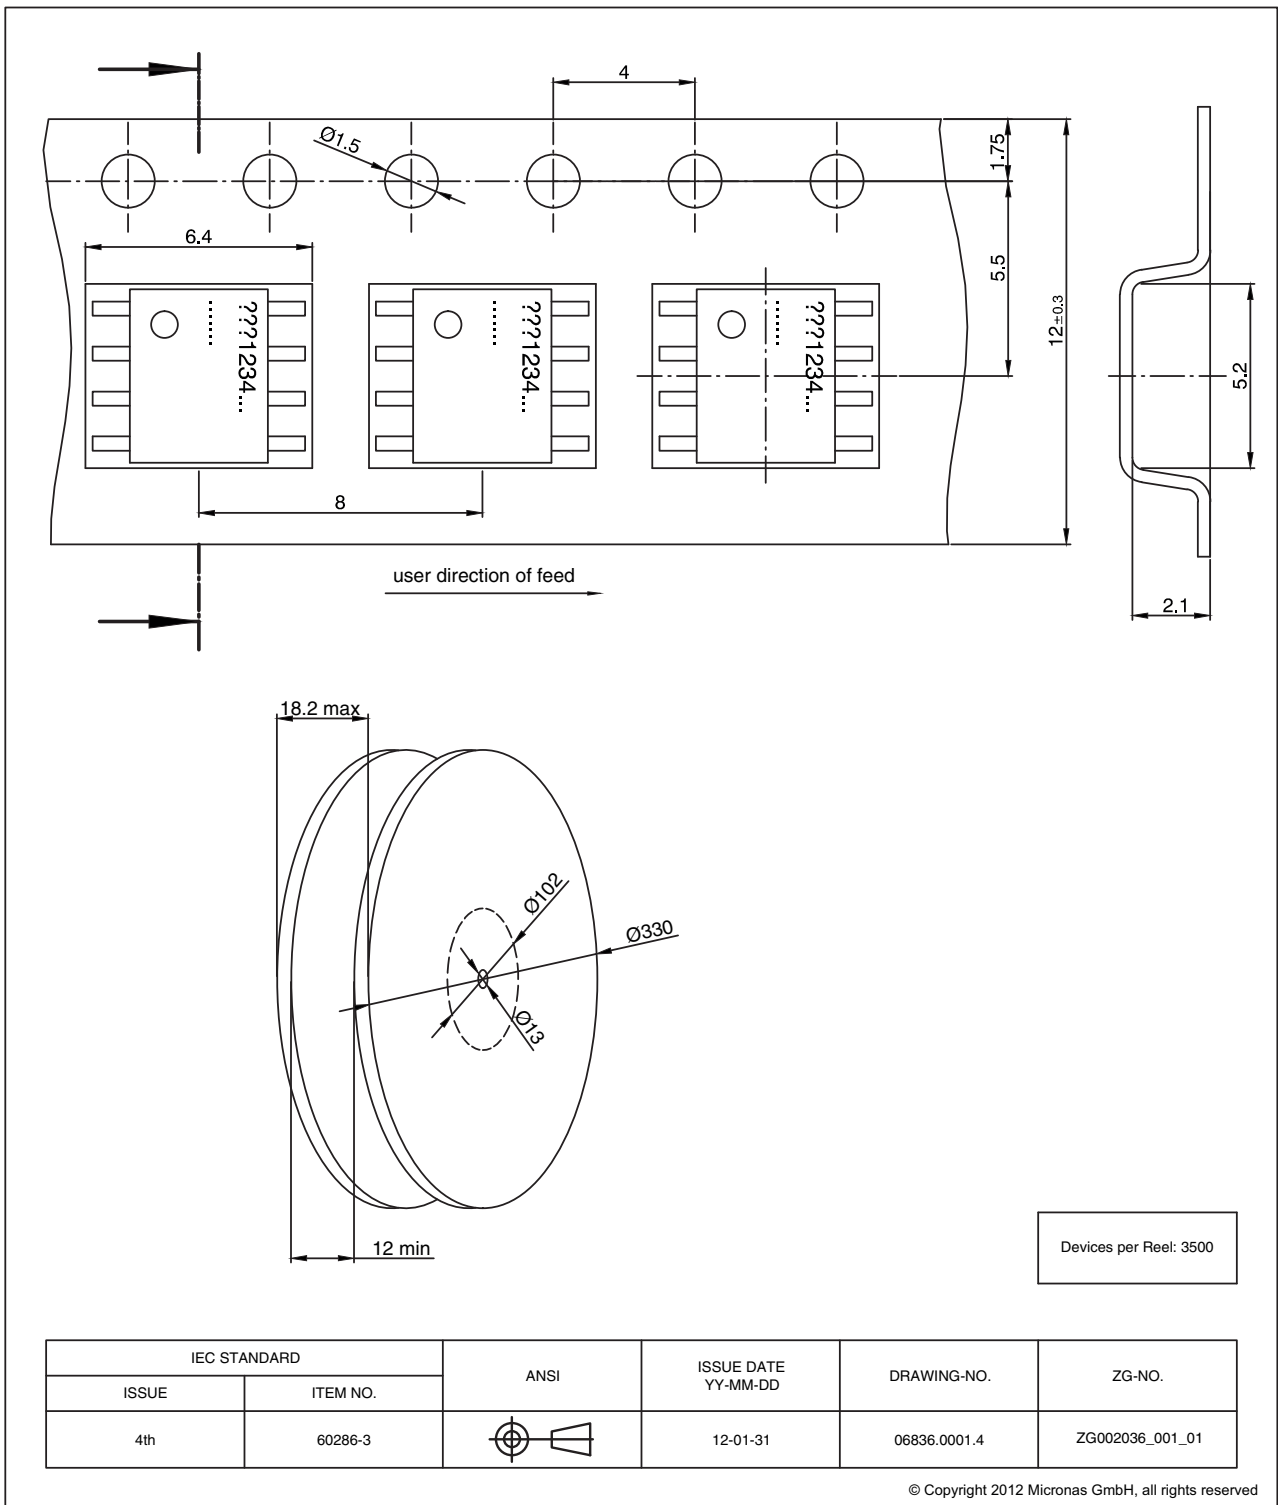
SOIC8-1: Tape and Reel Finishing, all dimensions in mm
